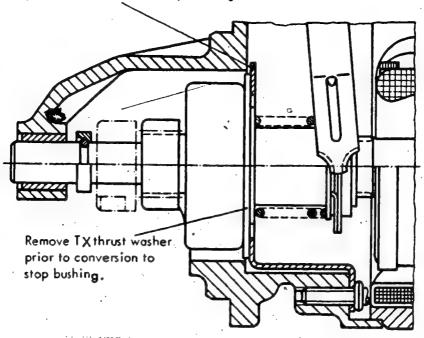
Starting motor to date - 0 001 211 206 with drive-end-bearing housing 1 005 822 280 (changes to 0 001 211 228 after conversion of drive-end-bearing housing).
